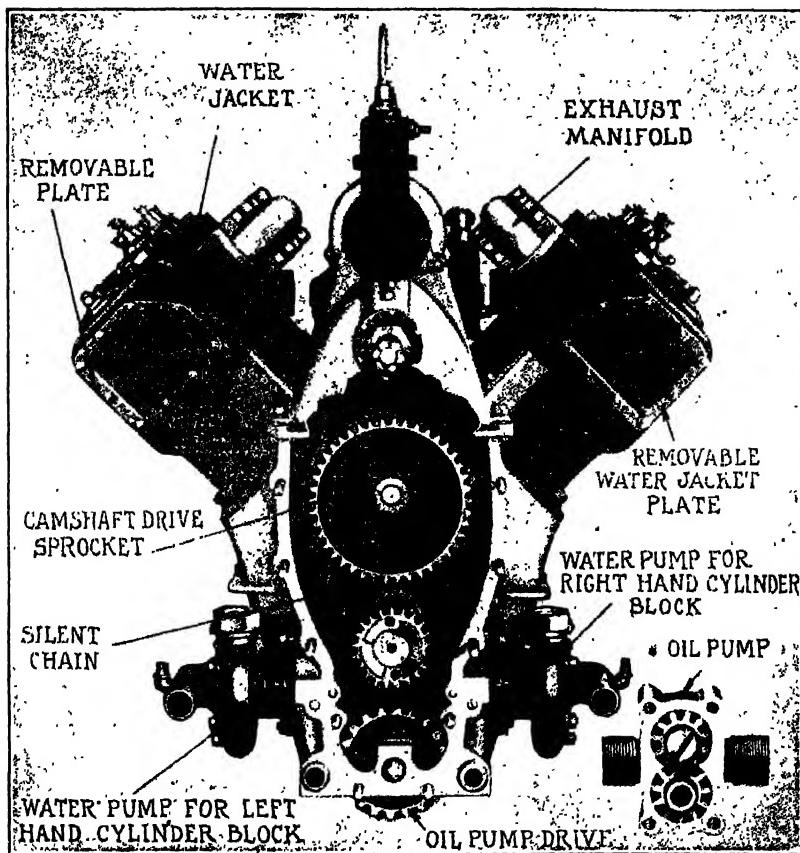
Method of Driving Camshaft of Cadillac Eight Cylinder Motor by Silent Chains.
